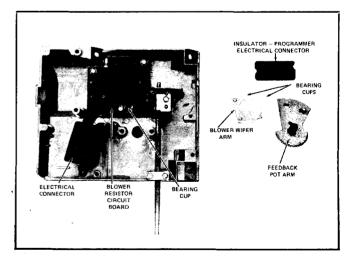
B-59 Blower Wiper Arm and Feedback Pot Arm
